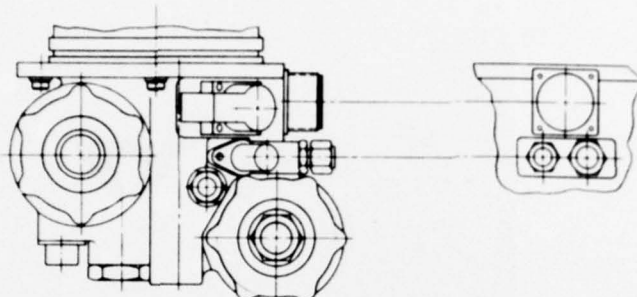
FLY-BY-WIRE INTEGRATED TAIL ROTOR SERVO ASSEMBLY.
